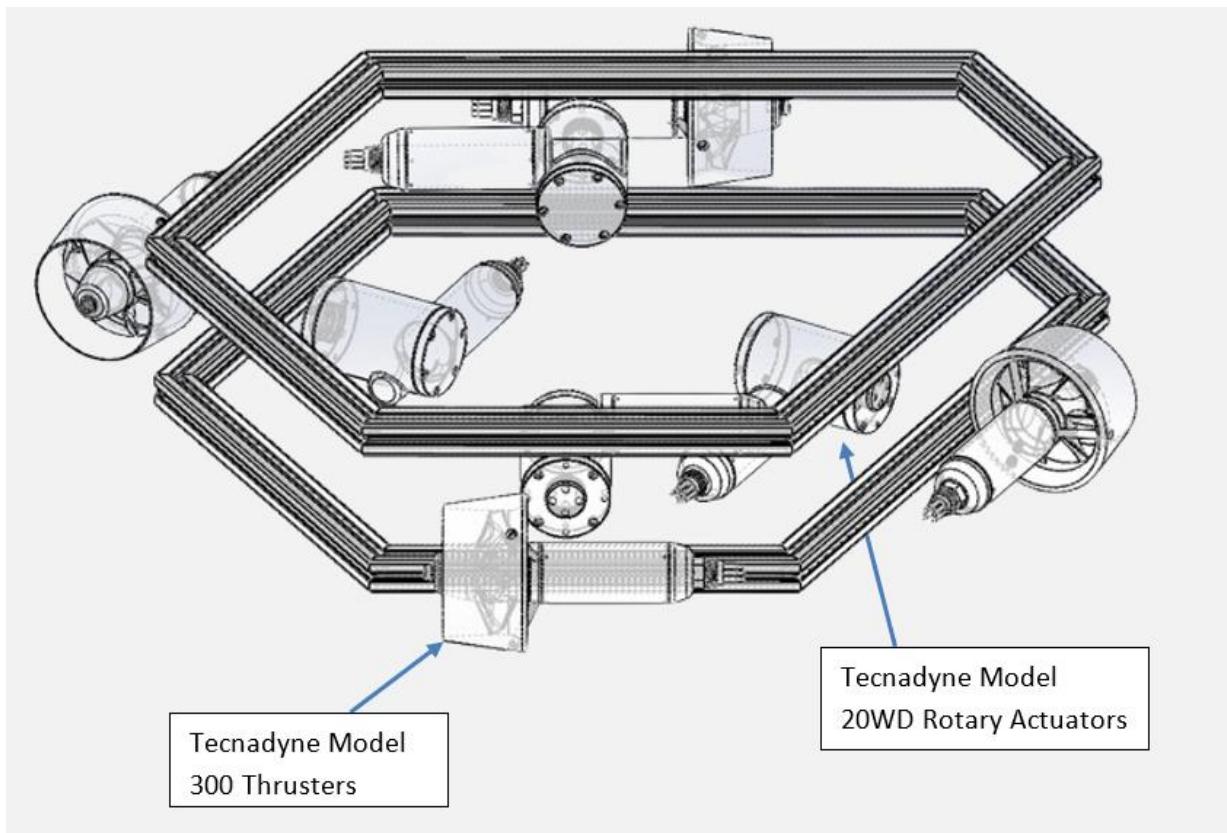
The final fall semester CAD drawing with the Tecnadyne Model 300 thrusters and Tecnadyne Model 20WD rotary actuators labeled. (team-fig)
